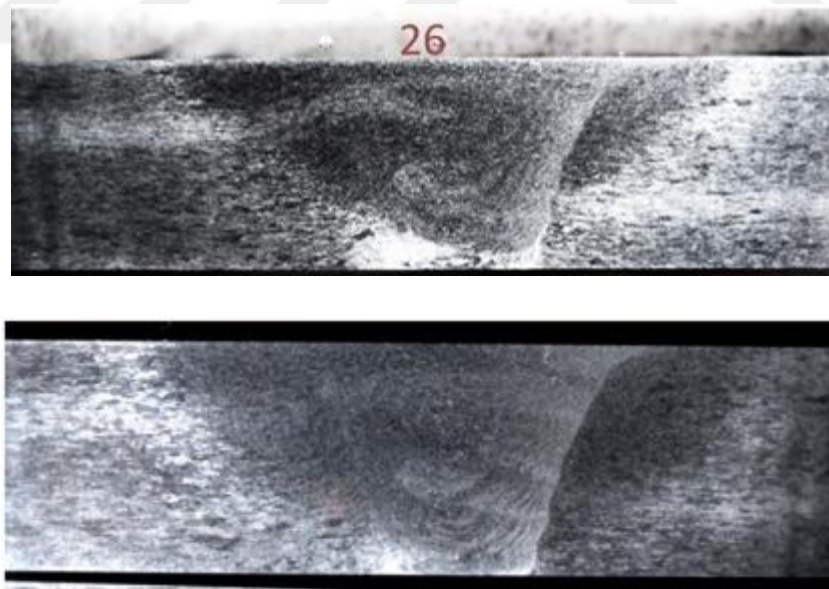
4: Stereo Microscope Image of the Weld Zone for FSW-26 Un-Aged and Aged (respectively).
